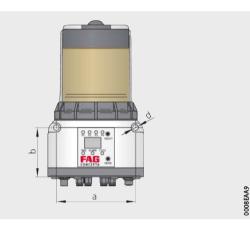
Mounting dimensions of FAG CONCEPT8-OIL
